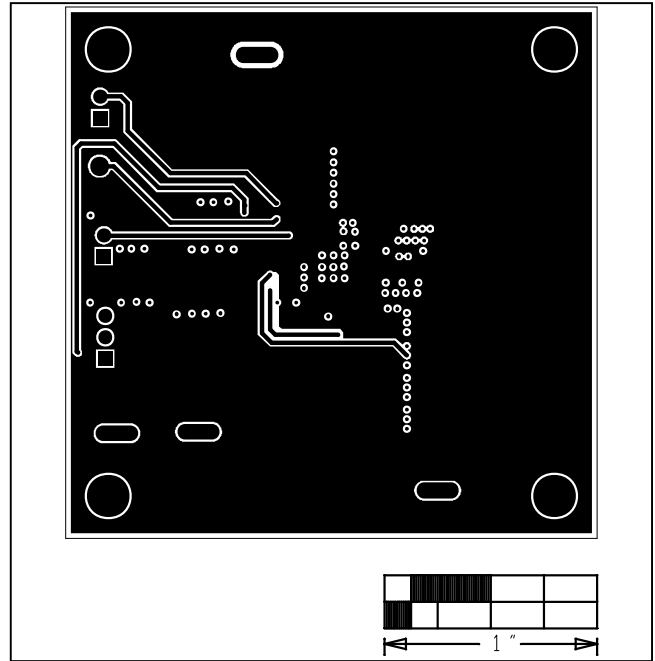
MAXM17504 EV Kit PCB Layout—PGND Layer 3
